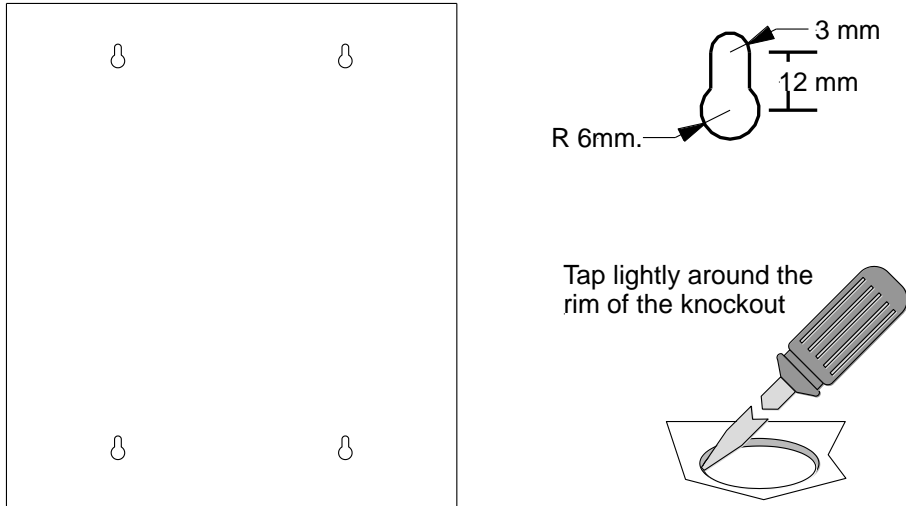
Example ZoneSense PLUS - AR Mounting & Removing Knockouts
